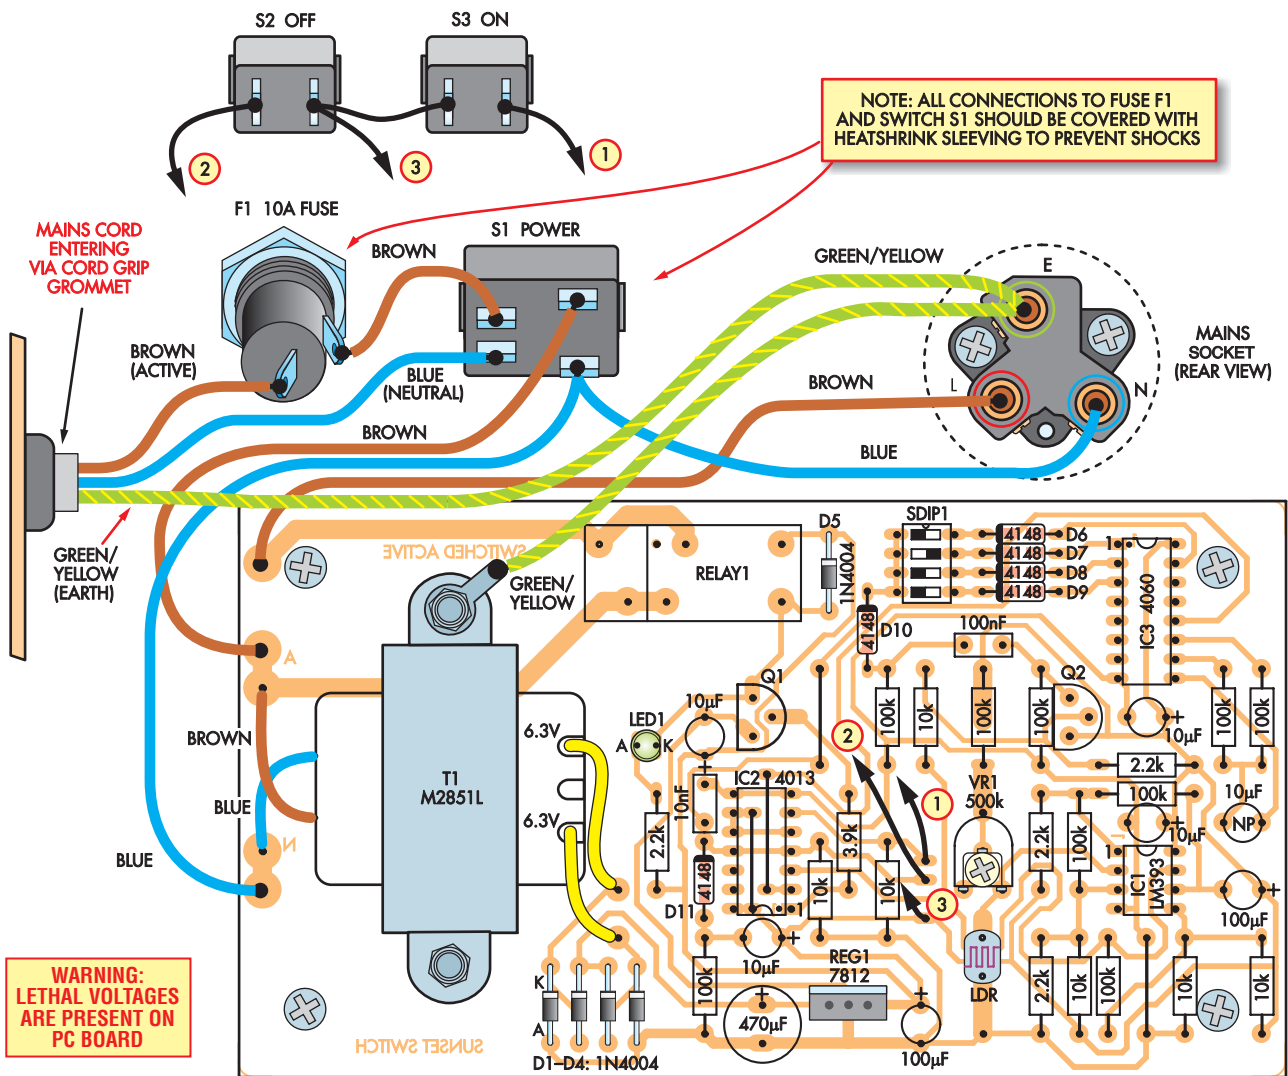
install the parts on the PC board and complete the wiring as shown here. Exercise extreme care when installing the mains wiring and make sure that all exposed mains terminals are sleeved with heatshrink tubing to avoid accidental contact with the mains voltages.
